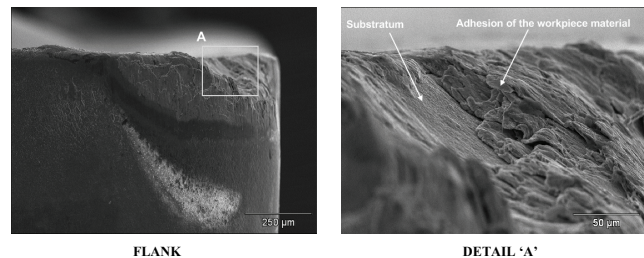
Flank wear land of the cutting edge used to cut the L1 alloy at the end of tool life $v_c = 250$ m/min.
